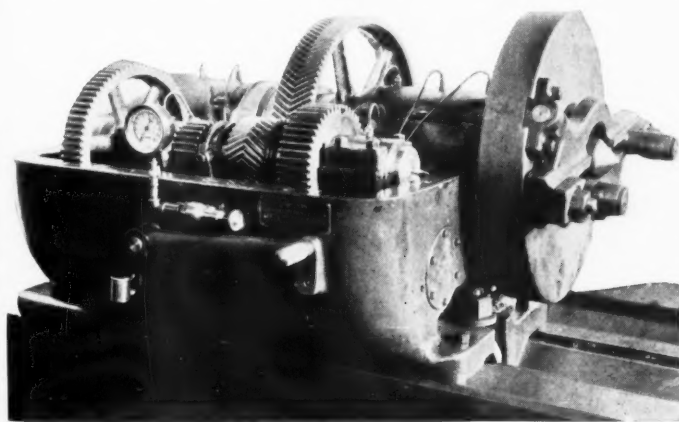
The headstock of a roll grinder equipped for pressure lubrication. The base forms the oil reservoir. A gear pump distributes the oil, the pressure of which is regulated by a relief valve.
